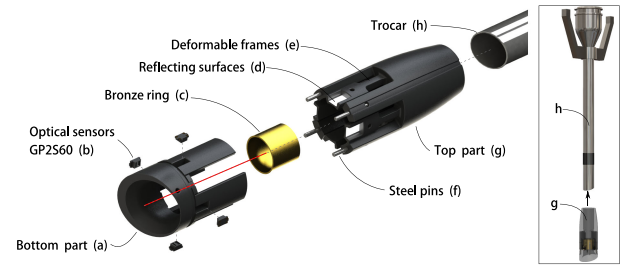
Exploded view of the force sensor CAD model. The assembly of the sensor on the trocar by interference is illustrated on the right.
